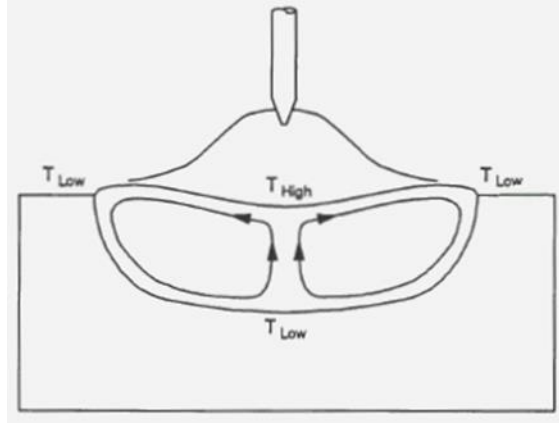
Buoyancy induced fluid flow in the weld pool [4].
